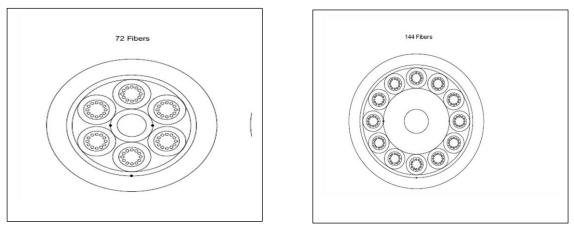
Cross section view of the single jacket dry core loose tube fibre optic cable
